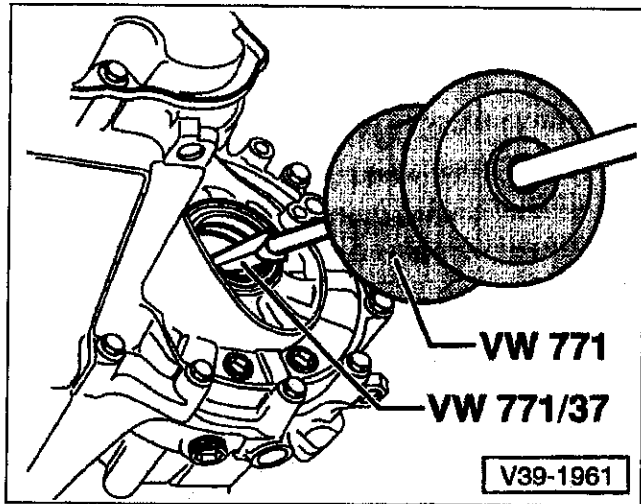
Drive flange oil seal being removed using slide hammer and hooked adapter (Volkswagen special tool no. VW 771 and VW 771/37).
